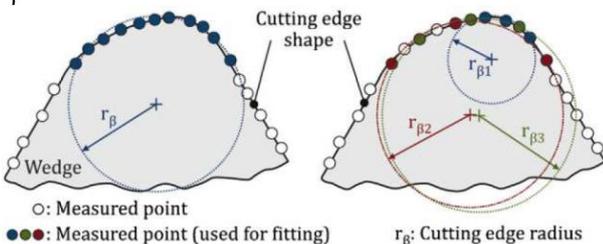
Inaccuracy when describing cutting edge geometry with one single radius [7].
